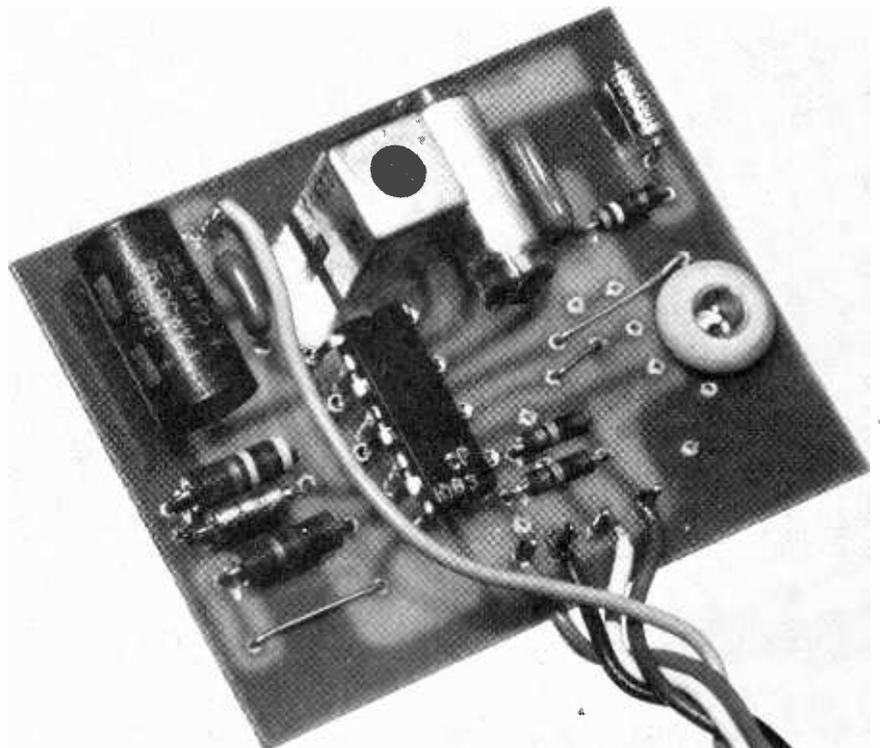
Photograph of the prototype. Because this is a demonstration model built by R.C.A. some of the components shown in Fig. 2 are not included.
